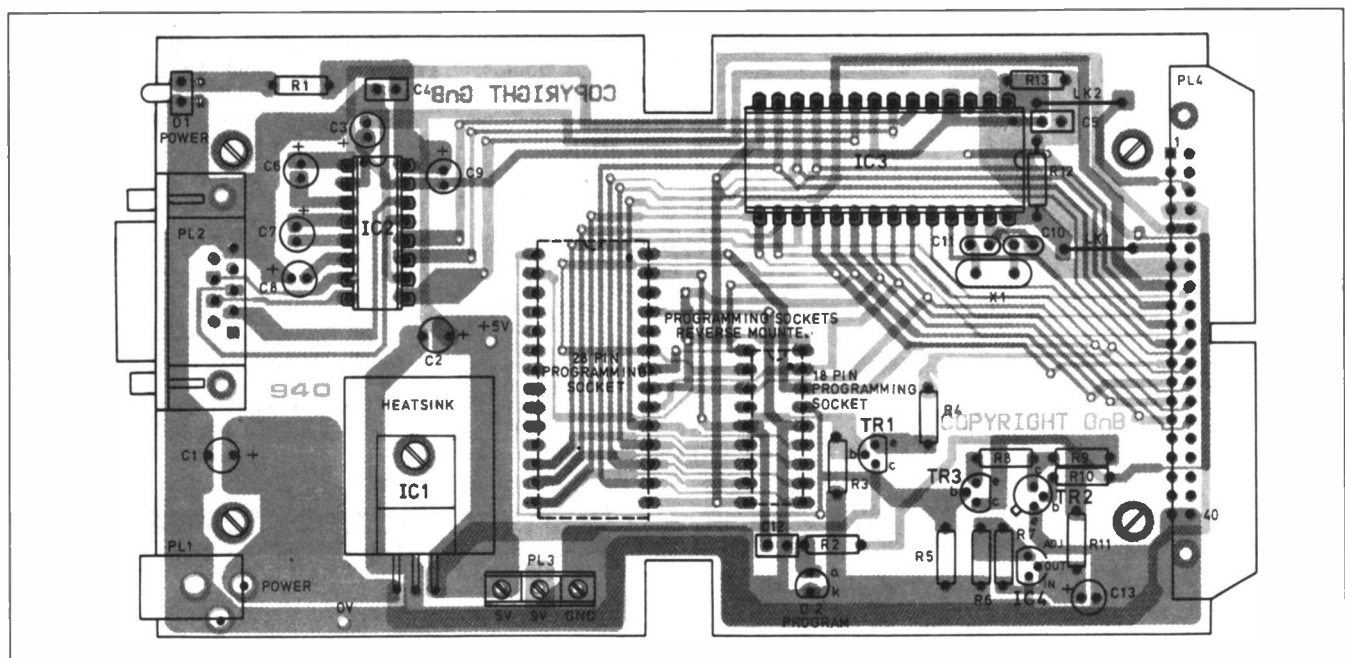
Component layout on the top side of the double-sided PTH board. Note that the 18-pin and 28-pin programming sockets are mounted on the rear of the board.
